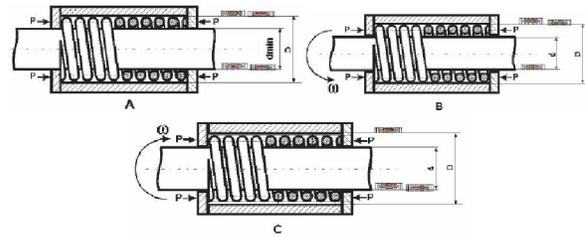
The fit scheme on the working surfaces of the hinge bearing with elastic spring insert: A - bearing is at rest; B and C - the axis rotation (spigot) in different directions
